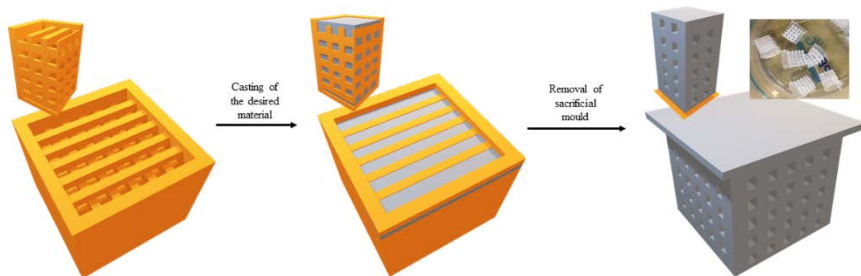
Scheme depicting indirect rapid prototyping process. From left to right: CAD design of the negative, sacrificial mould printed in PLA with a strut of 650µm and a pore size of 750 µm ; Casted material inside the mould; Obtained scaffolds after dissolving the mould in chloroform with a pore size of 650 µm and a strut size of 750µm.
